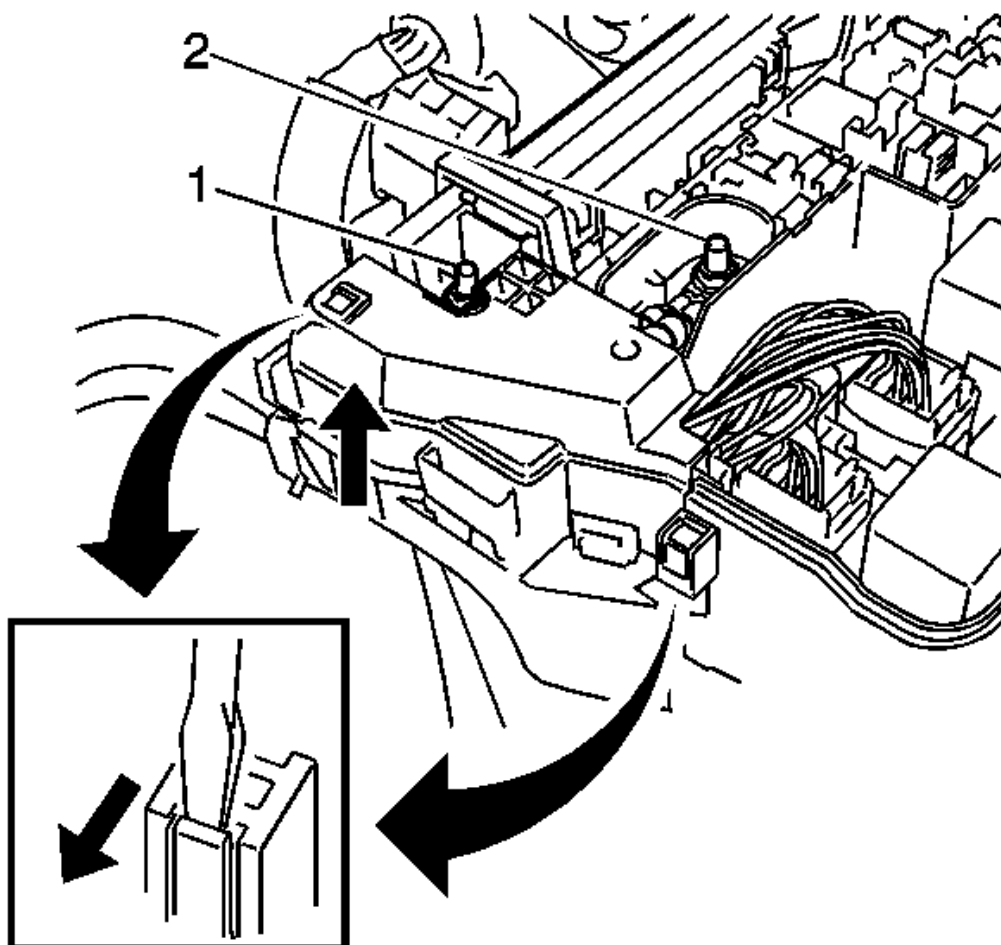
Locating Engine Room Junction Block, Wire Harness & Connectors
